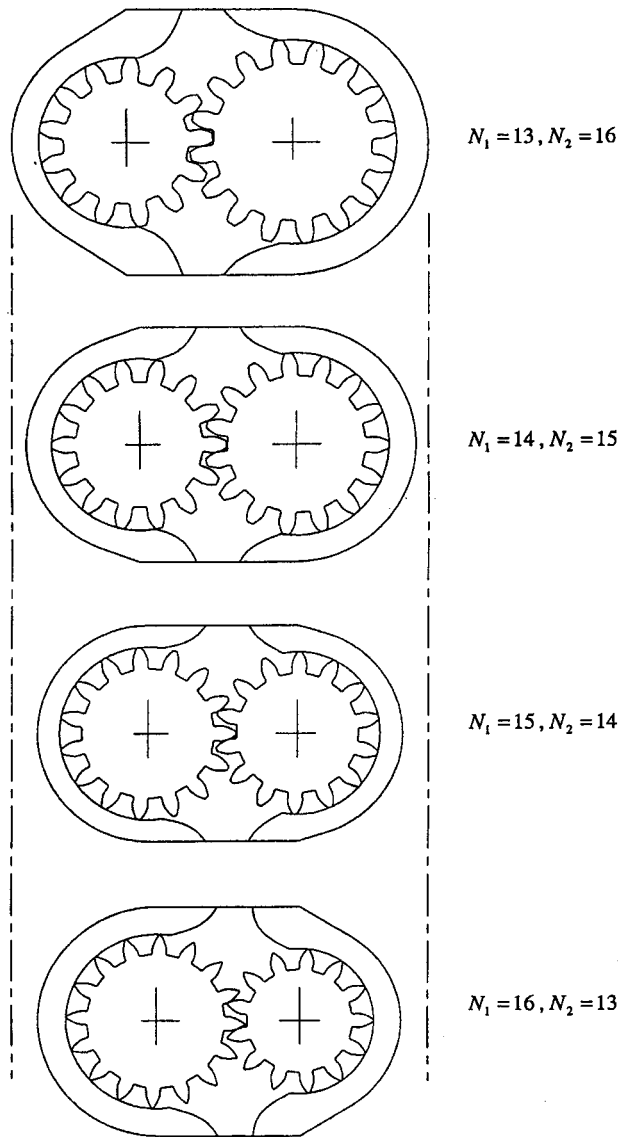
Gear pumps of the same displacement designed with different numbers of teeth on the driving and driven gears
